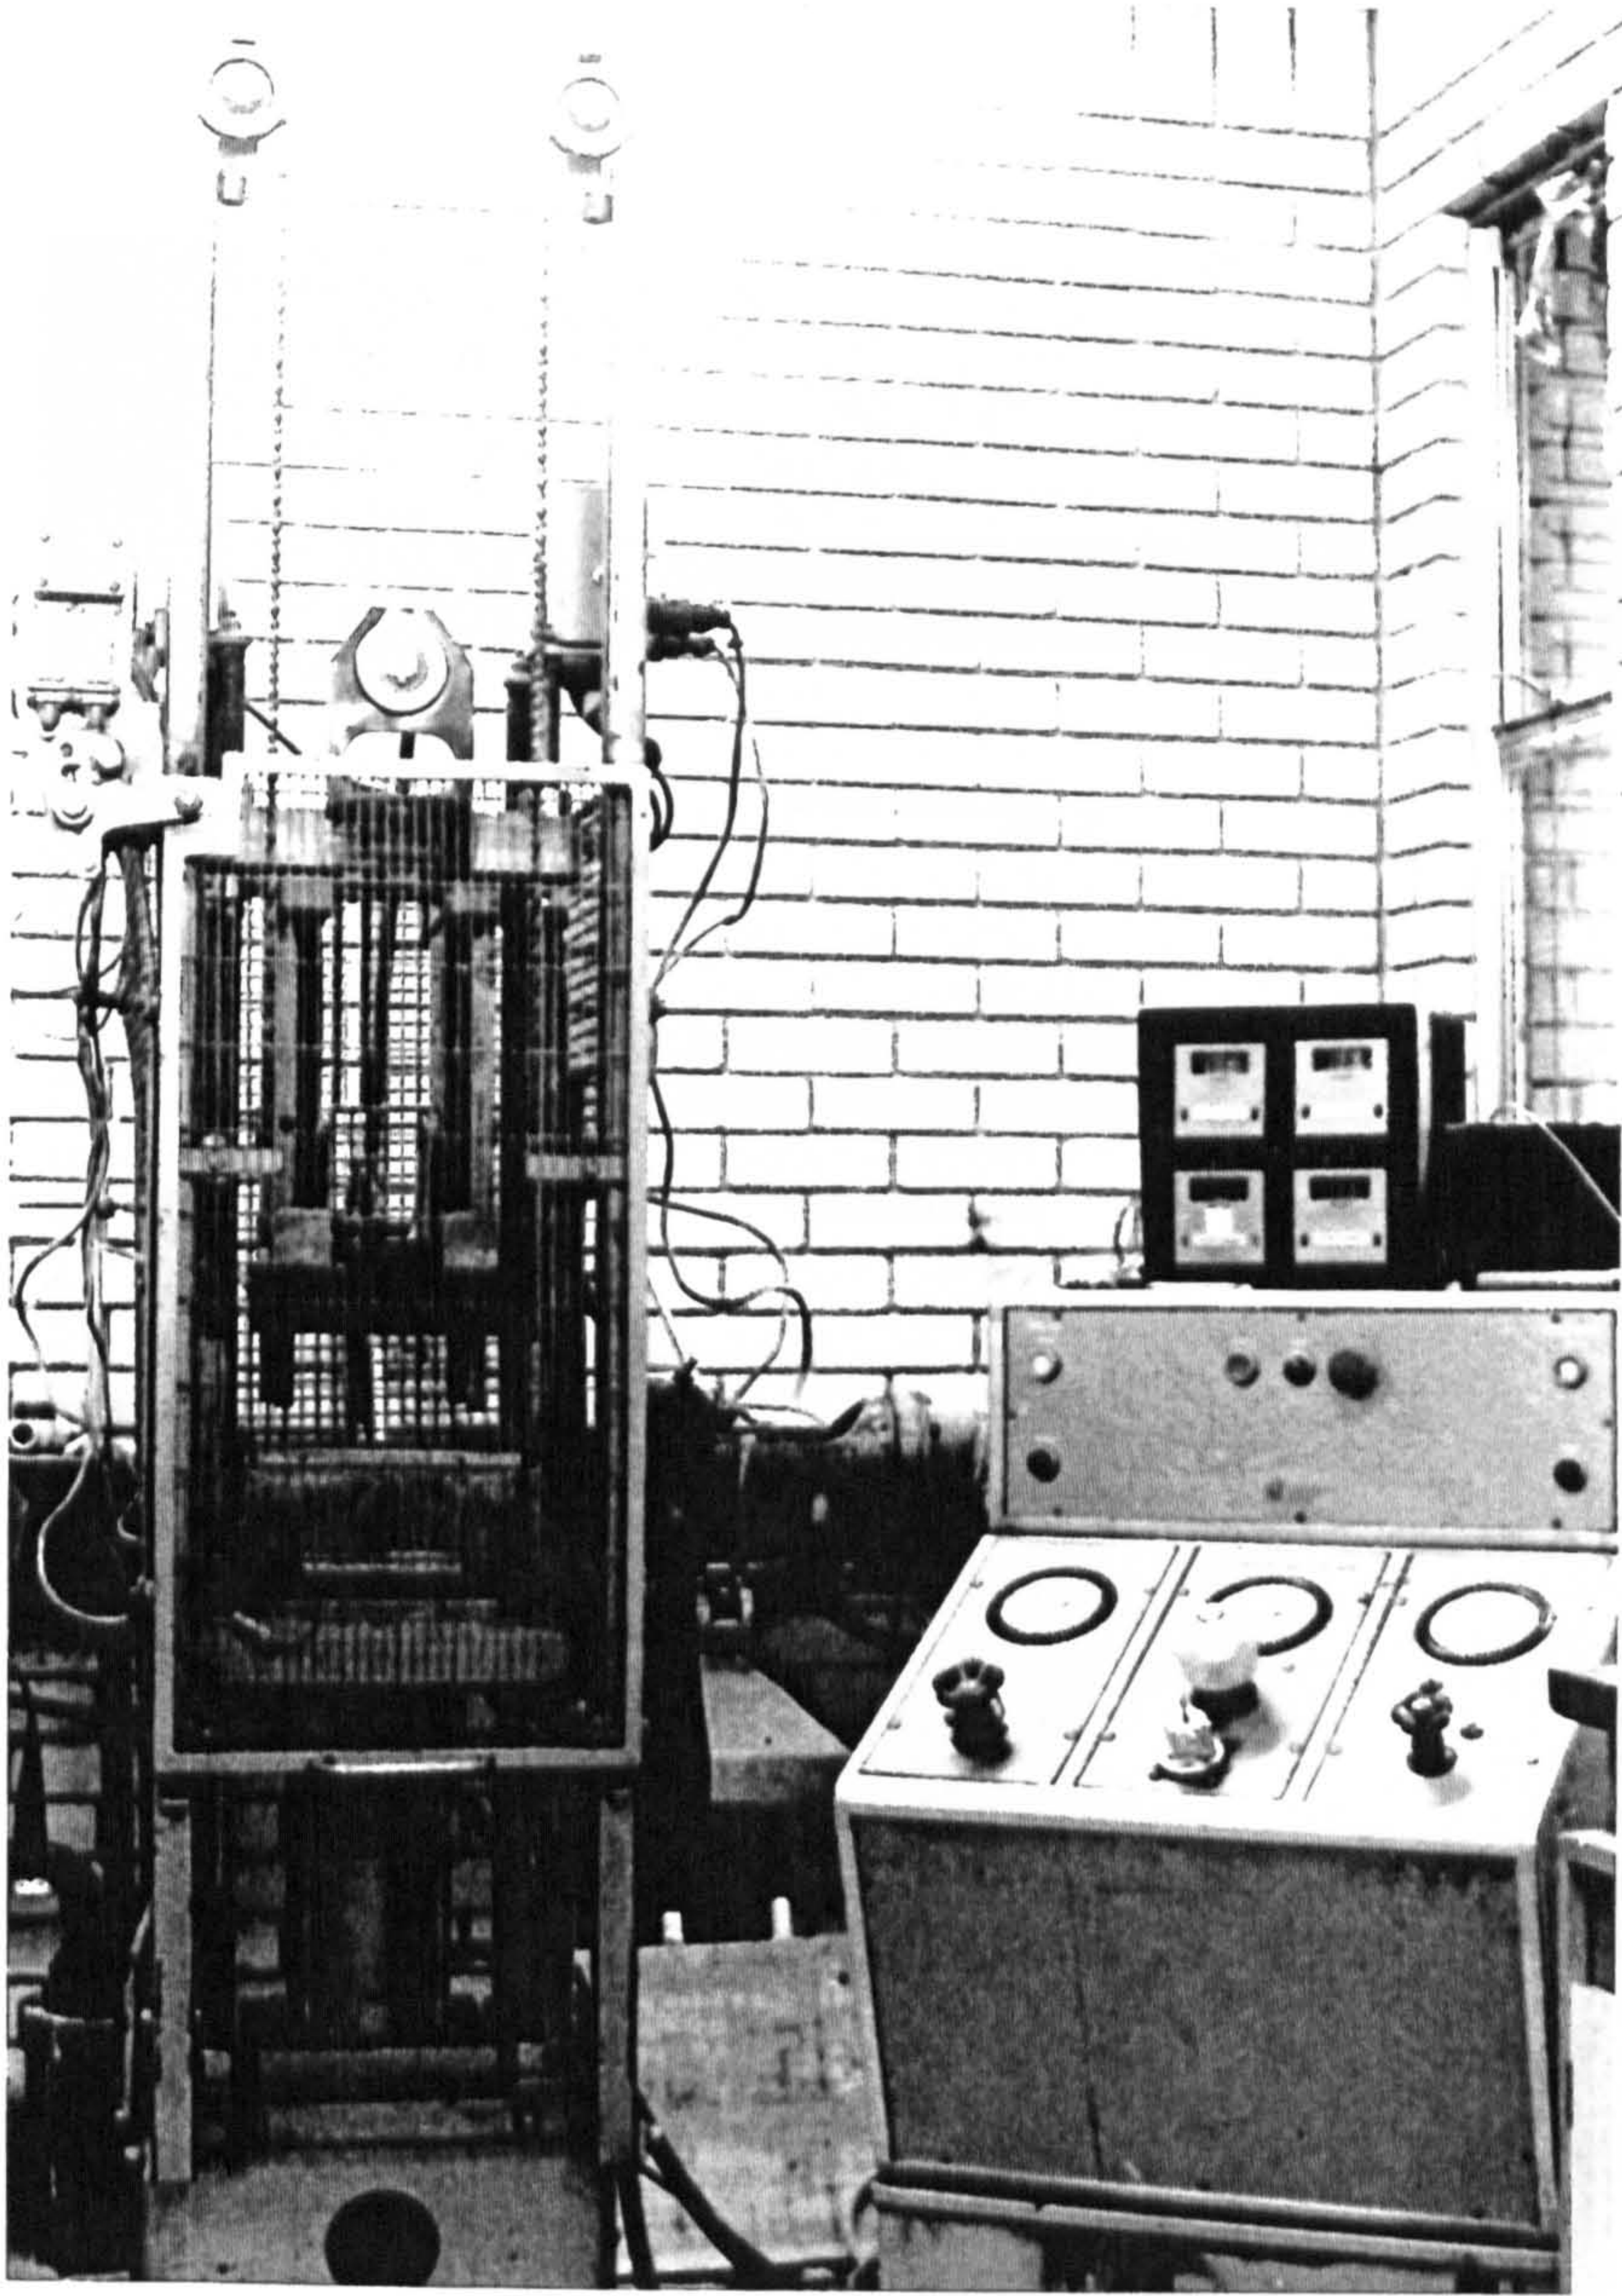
Picture of the Fox and Offord plunger type injection moulding machine used for the moulding of simple geometries.
